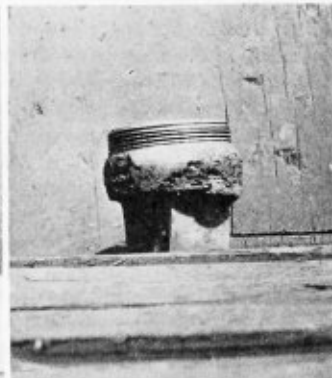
Washout Plug Which Blew Out While Being Tightened Under Pressure
